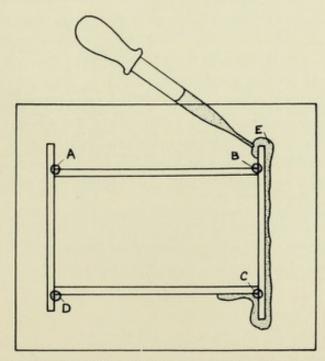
The first drops of Tensol Cement No. 7 retain the sides of the mould in position at A, B, C and D. At E, Tensol Cement is added for the final sealing
